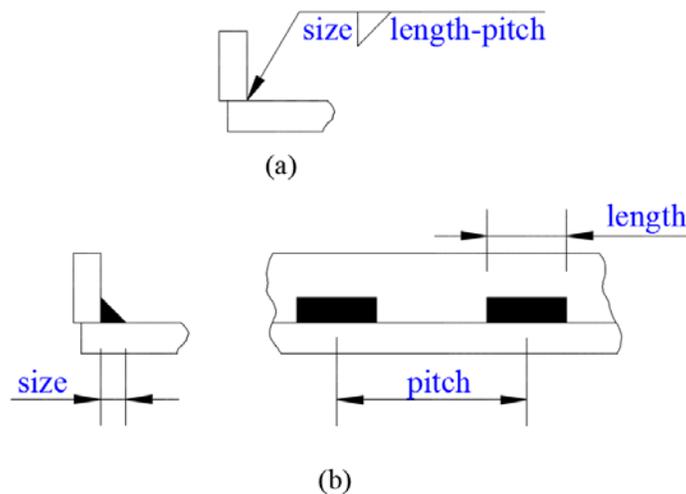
Fillet weld size, length, and pitch terminology
